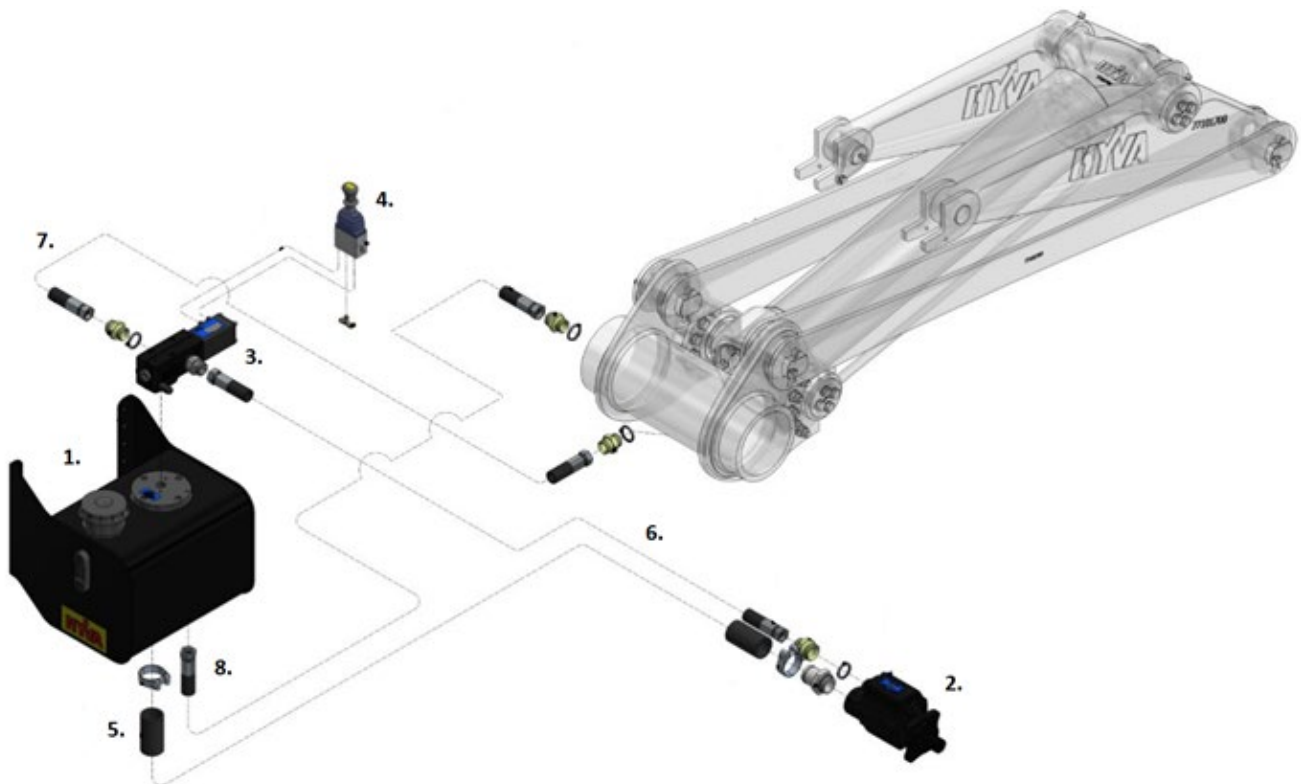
EXAMPLE OF A HYDRAULIC TIPPER SCISSOR SYSTEM
